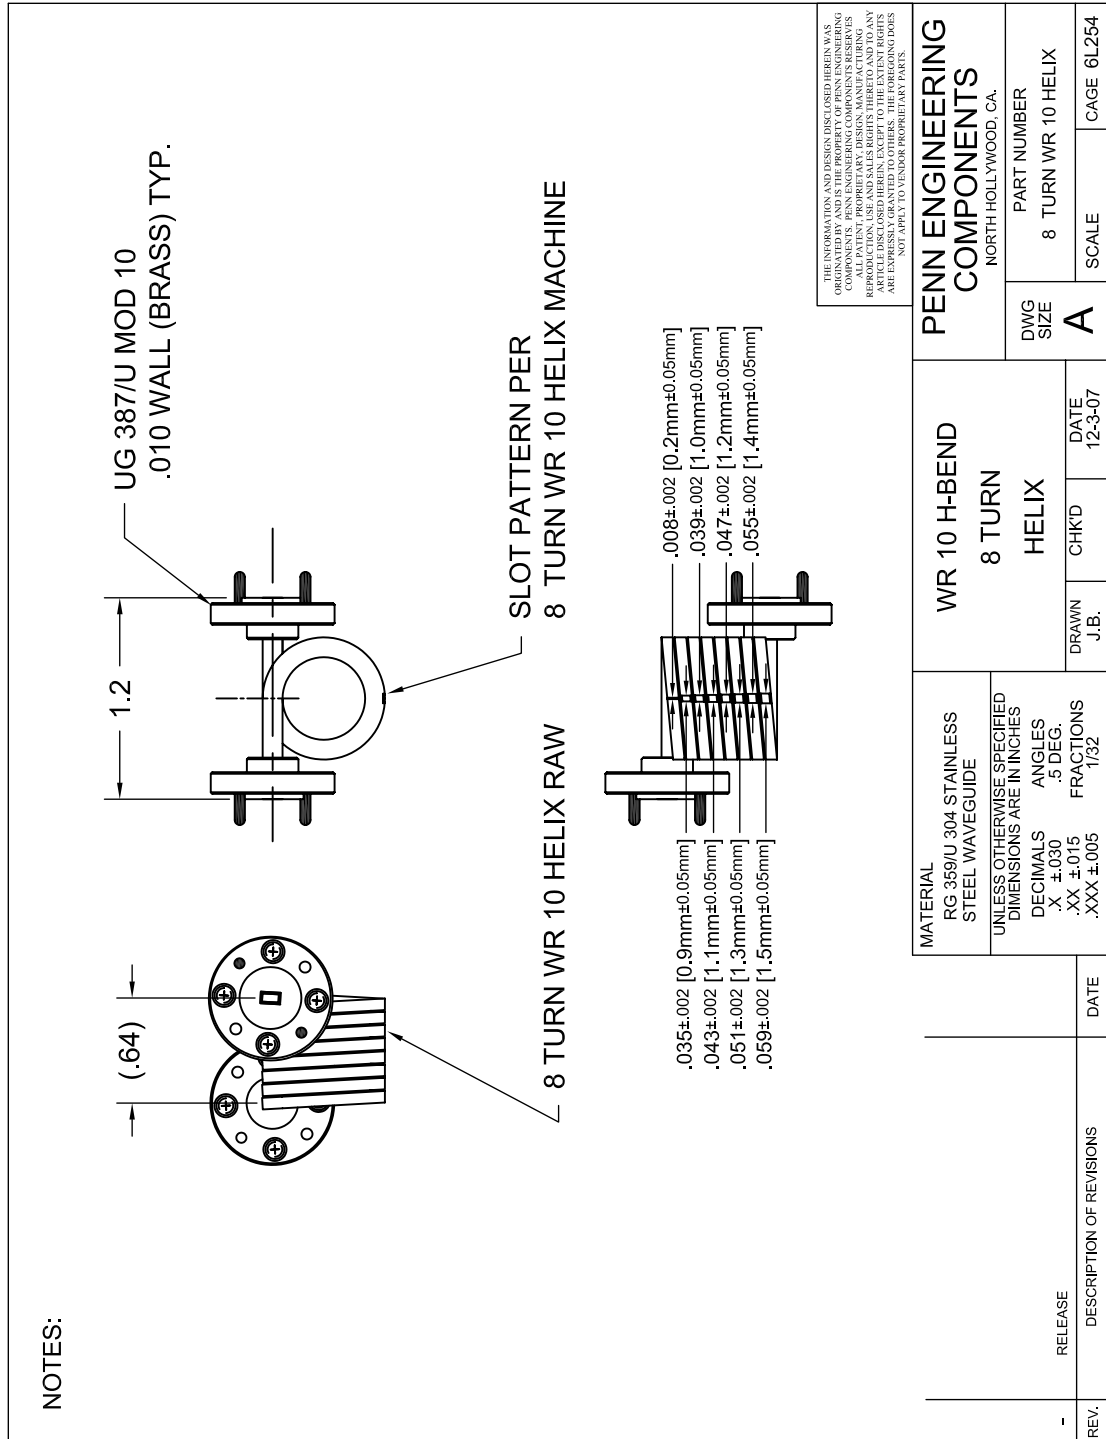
Mechanical drawing of the 8 turn helical waveguide-fed slot array.
